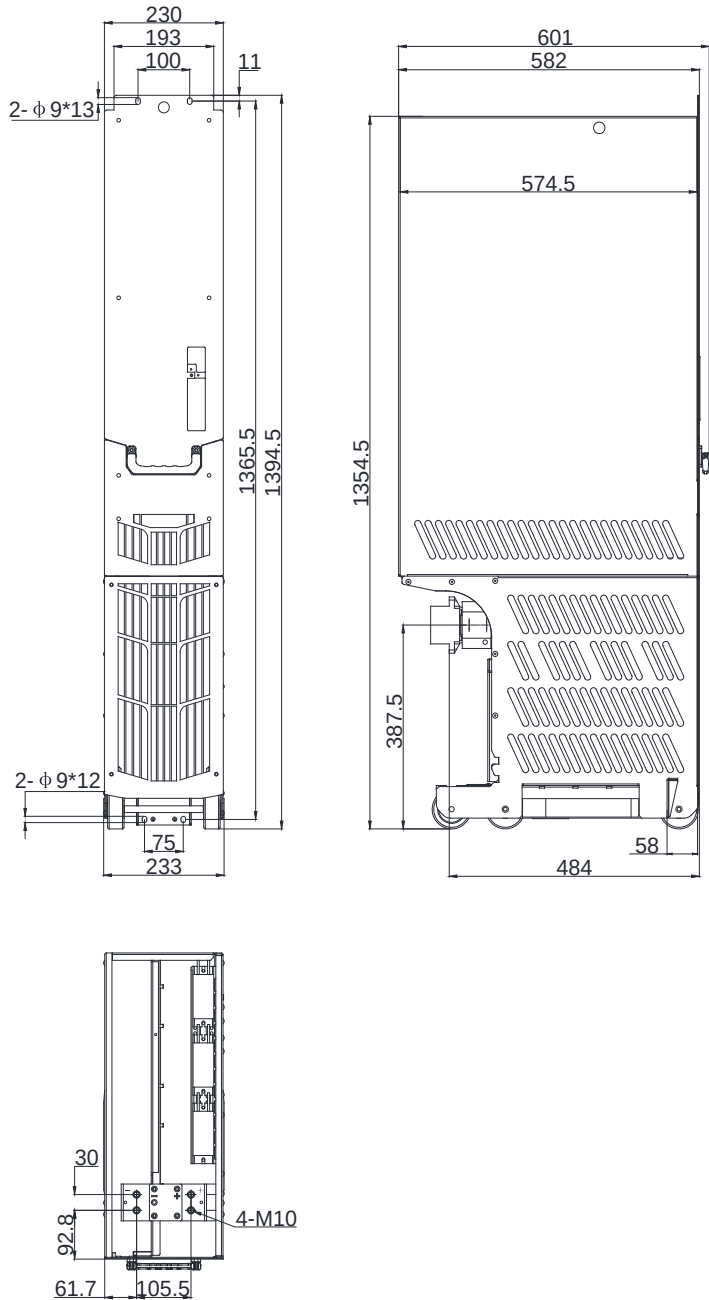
Dimensions of Size H8 Inverter (mm)
